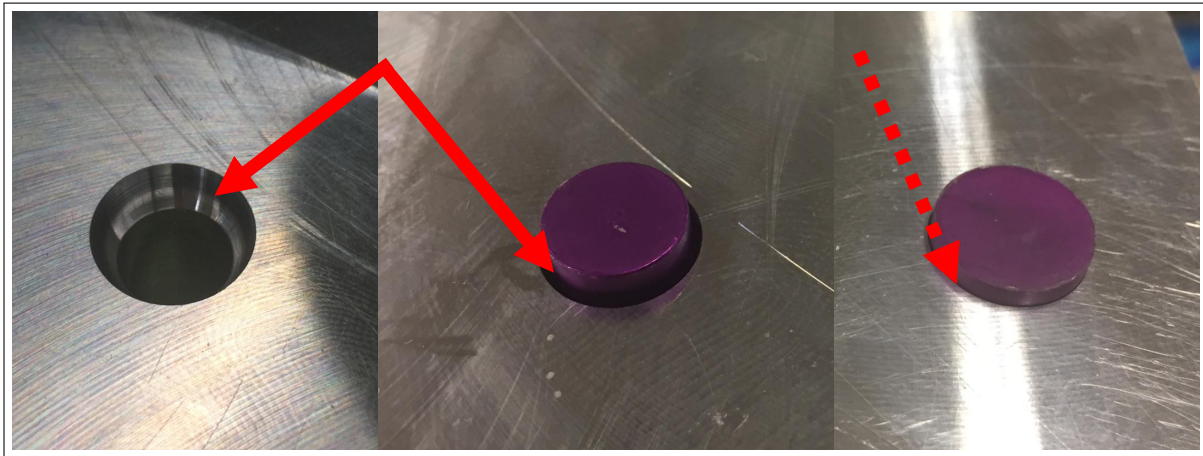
Illustrates the head formation of the rivet in three stages. The countersink is visible and ready to receive the appropriate sized rivet (left). The rivet is placed into the hole, and the countersink remains partially visible (center). The rivet is formed, causing the head of the rivet to fill in the countersink (right). The countersink is flagged by solid red arrows, and the filled countersink is indicated by the dashed red arrow.
